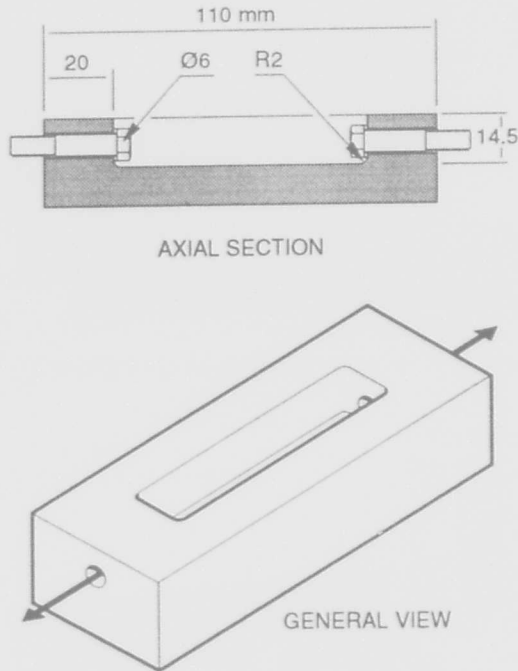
BOLTED ZONE SAMPLE AND TEST DEVICE
